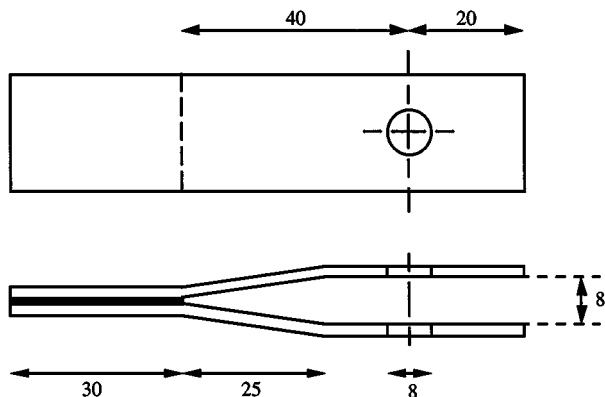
Ford specimen design. (All dimensions in millimetres.)
